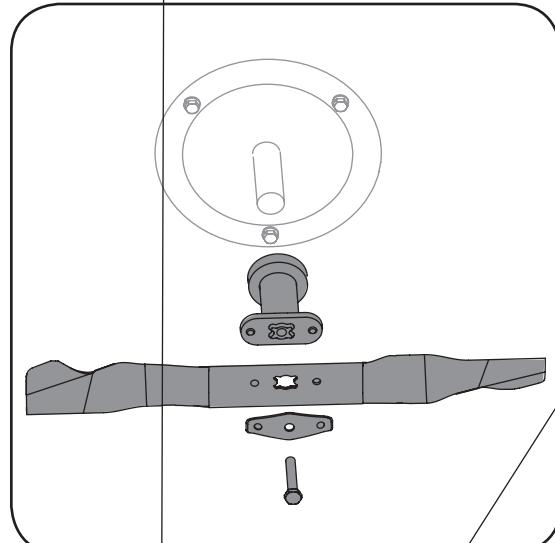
Remove the bolt, support, and adapter to access the blade.
